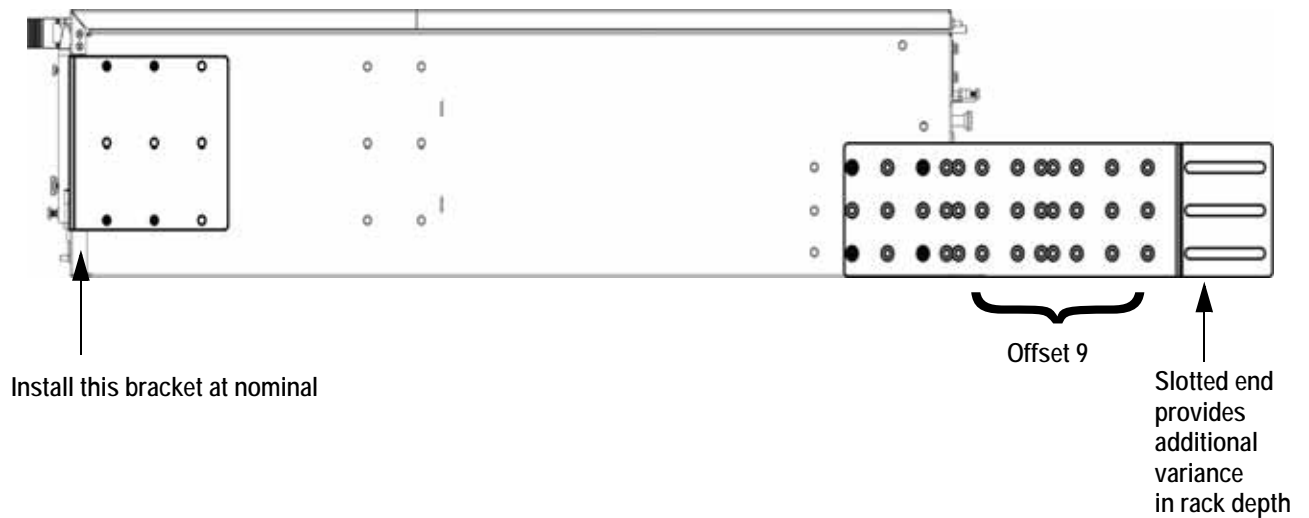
Bracket Mounting for 35.5" to 37" Rack
